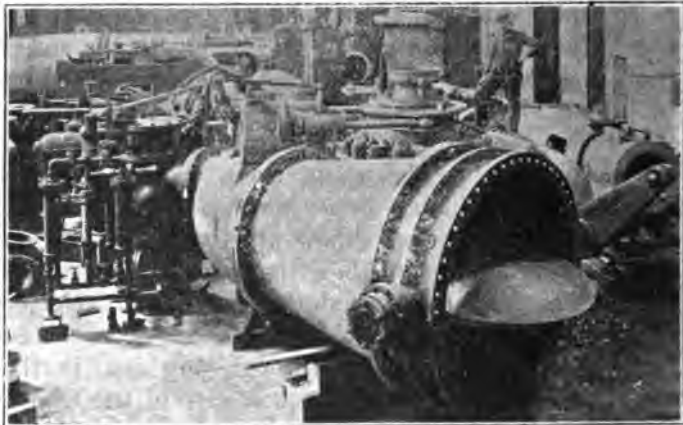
SHOP ASSEMBLY OF 15,000-H. P. TURBINE UNIT
